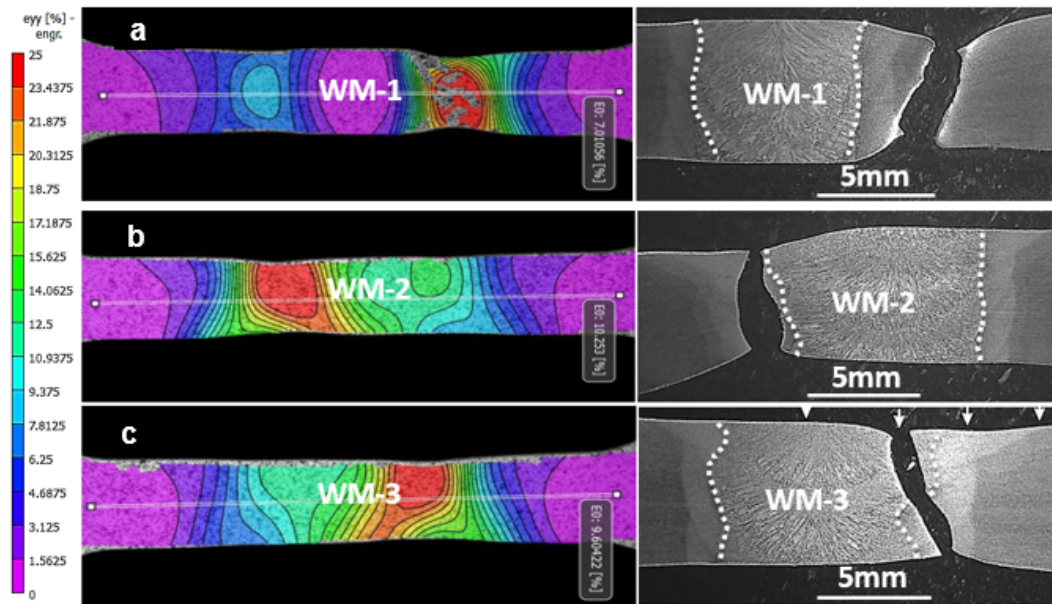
DIC strain maps with show the fracture location for cross weld samples A)- W1, B)- W2, and C)- W3.
